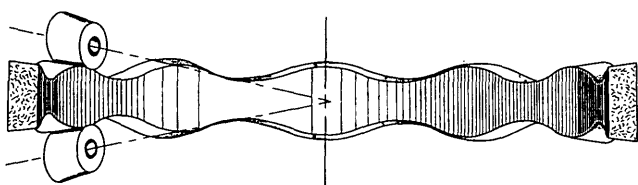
Twisted belt form of ring cam with conical rollers which make better use of space inside power canister
